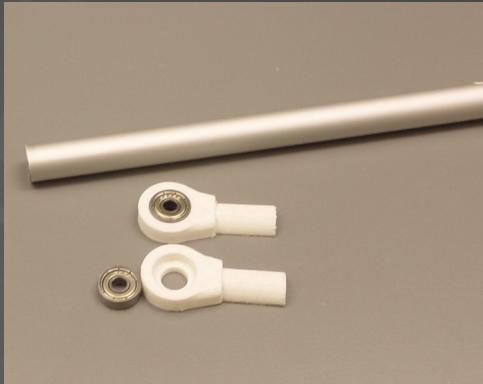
The joint for the main arm is fitted with 625Z bearings.
